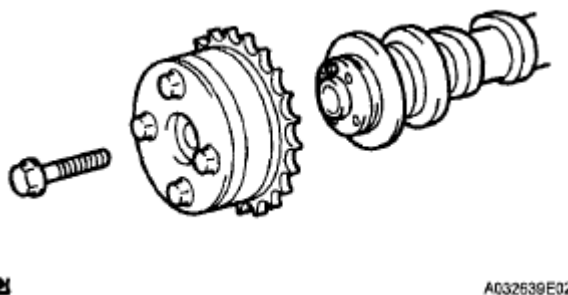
Identifying Flange Bolt And Camshaft Timing Gear
